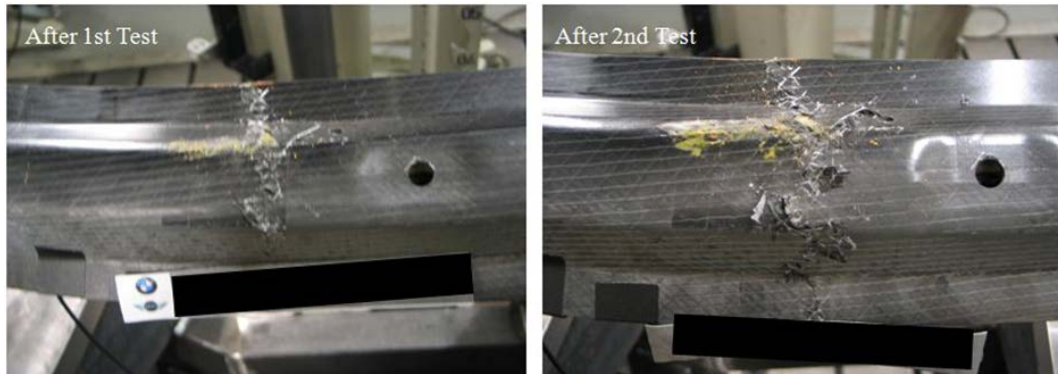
Roof Panel After 1<sup>st</sup> (left) and 2<sup>nd</sup> (right) Impact
